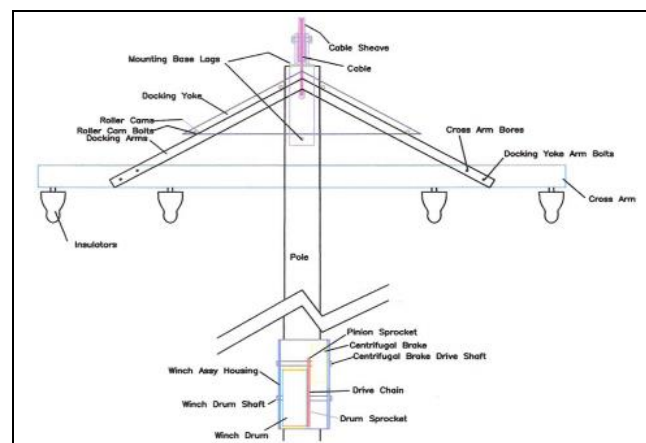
Sketch of cable-supported cross arm and docking yoke concept with winch assembly.
